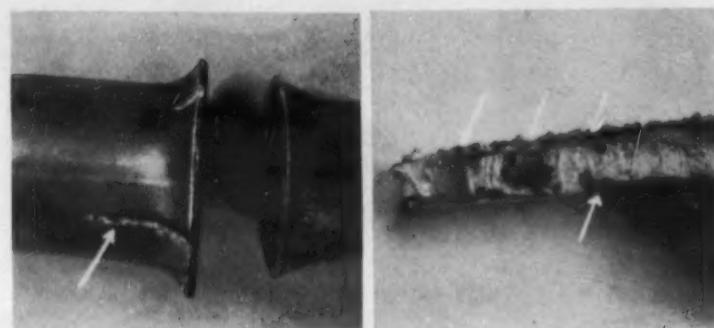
(Left) Typical defect in electrical butt-welded tube, cut off and expanded at location indicated by tester, to reveal imperfect weld. Tube is 1½ in. dia., 12 gage, low carbon steel. Same (right) weld broken open, showing short defects some of which penetrate only part way through the tube wall
